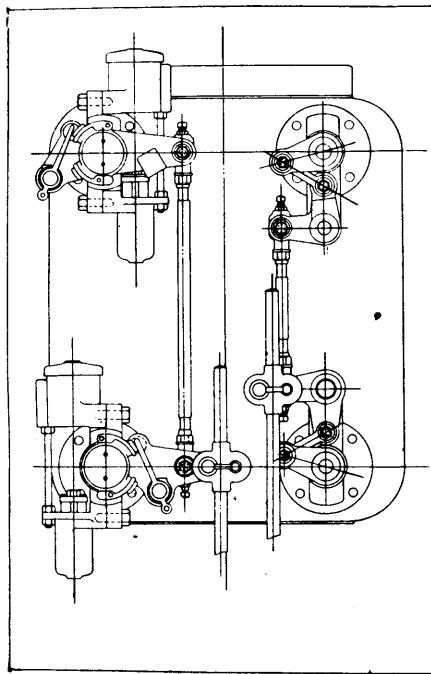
VALVE GEAR—H.P. CYLINDER.
